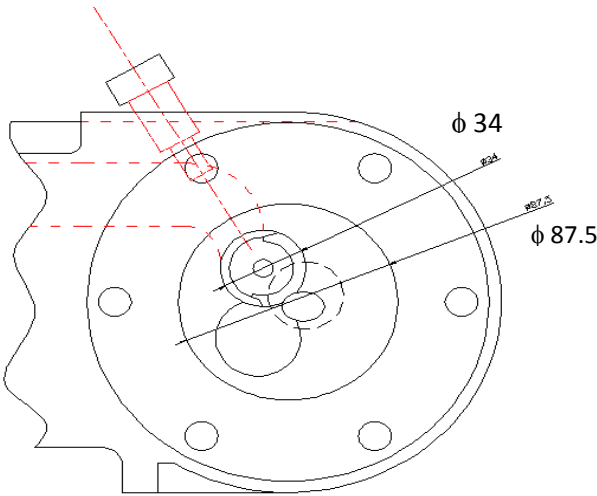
Location of premixed fuel injector on the cylinder head (b) Top View (All dimensions are in mm)
